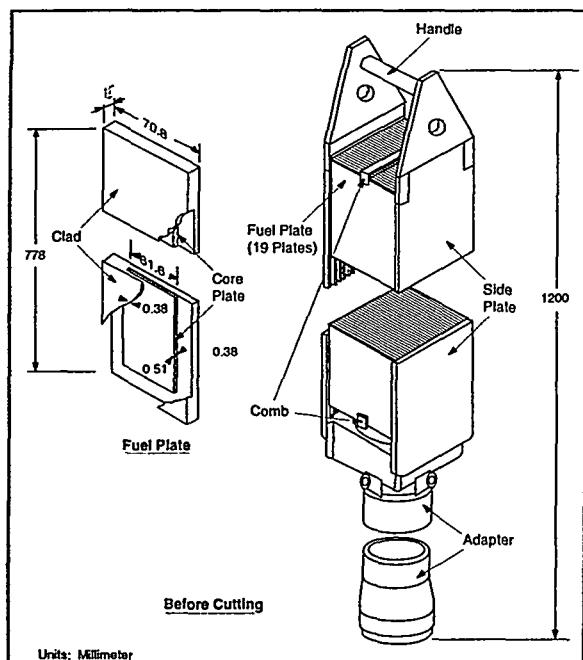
Typical Materials Test Reactor fuel assembly.
